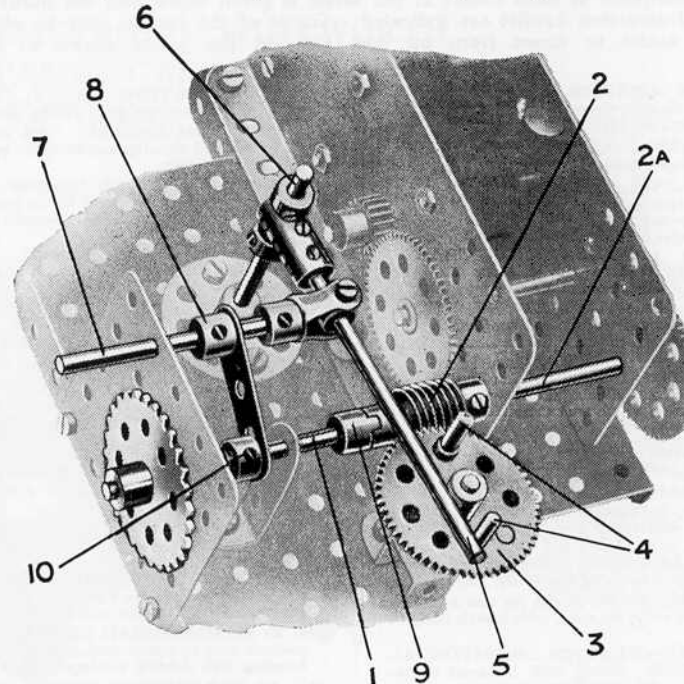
The Intermittent mechanism. One of the Pins 4 should be removed when using this mechanism in connection with the Single or Double Flyboats.
